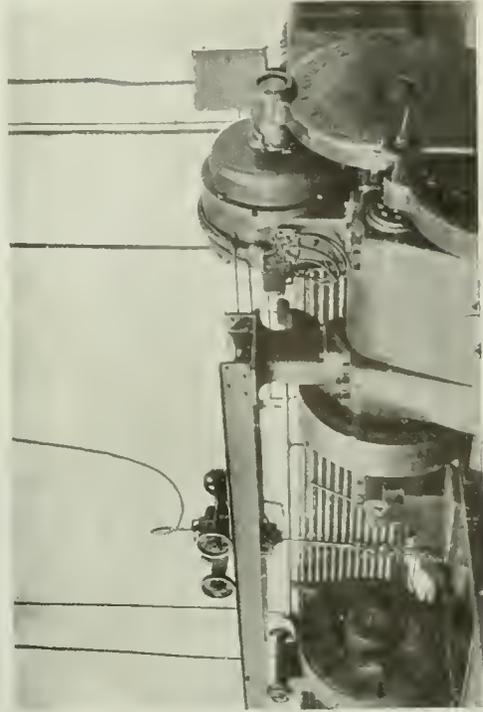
5-h.p., 230-volt, 500/1000-r.p.m. Direct-current Motors Driving 42-in. Car Wheel Lathe in Railroad Shop
